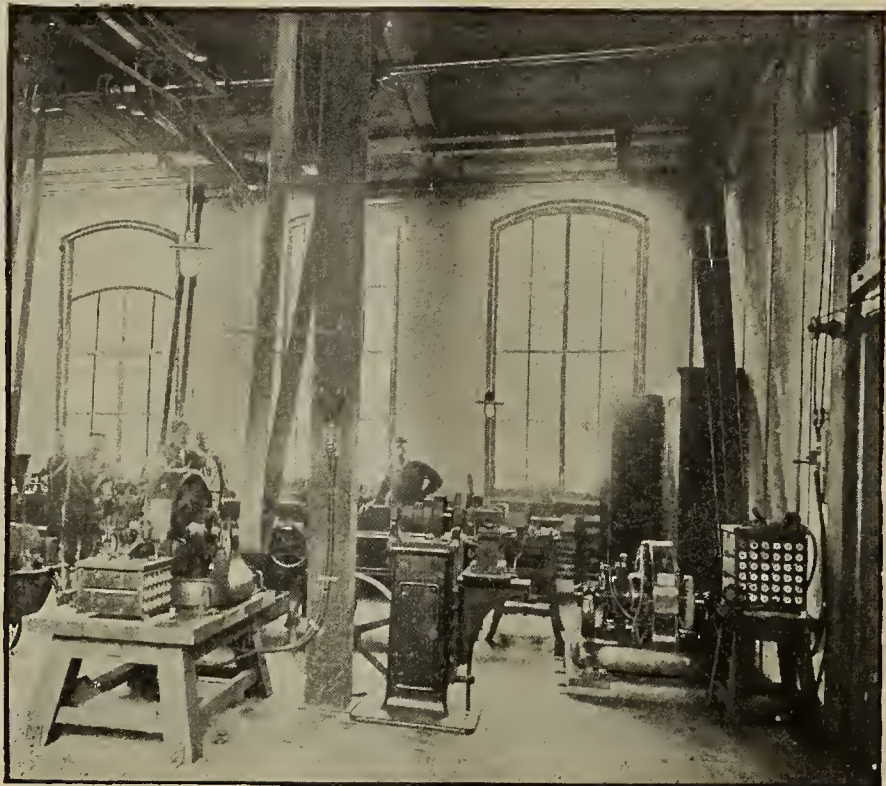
Corner of Machine Shop; One 10 H. P. Motor on Stand and One 16 H. P. Motor on Floor.
